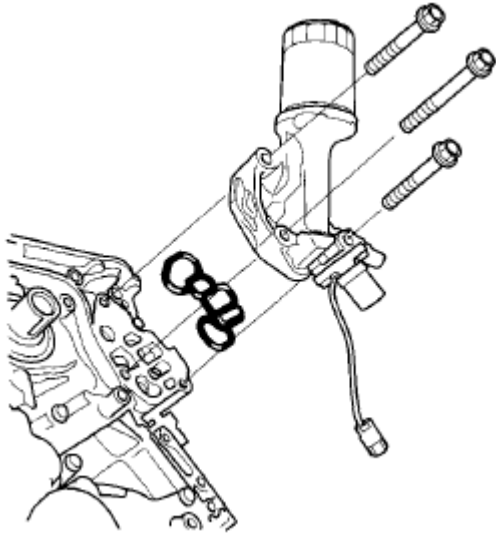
Removing Rocker Arm Oil Control Solenoid/Oil Filter Assembly
